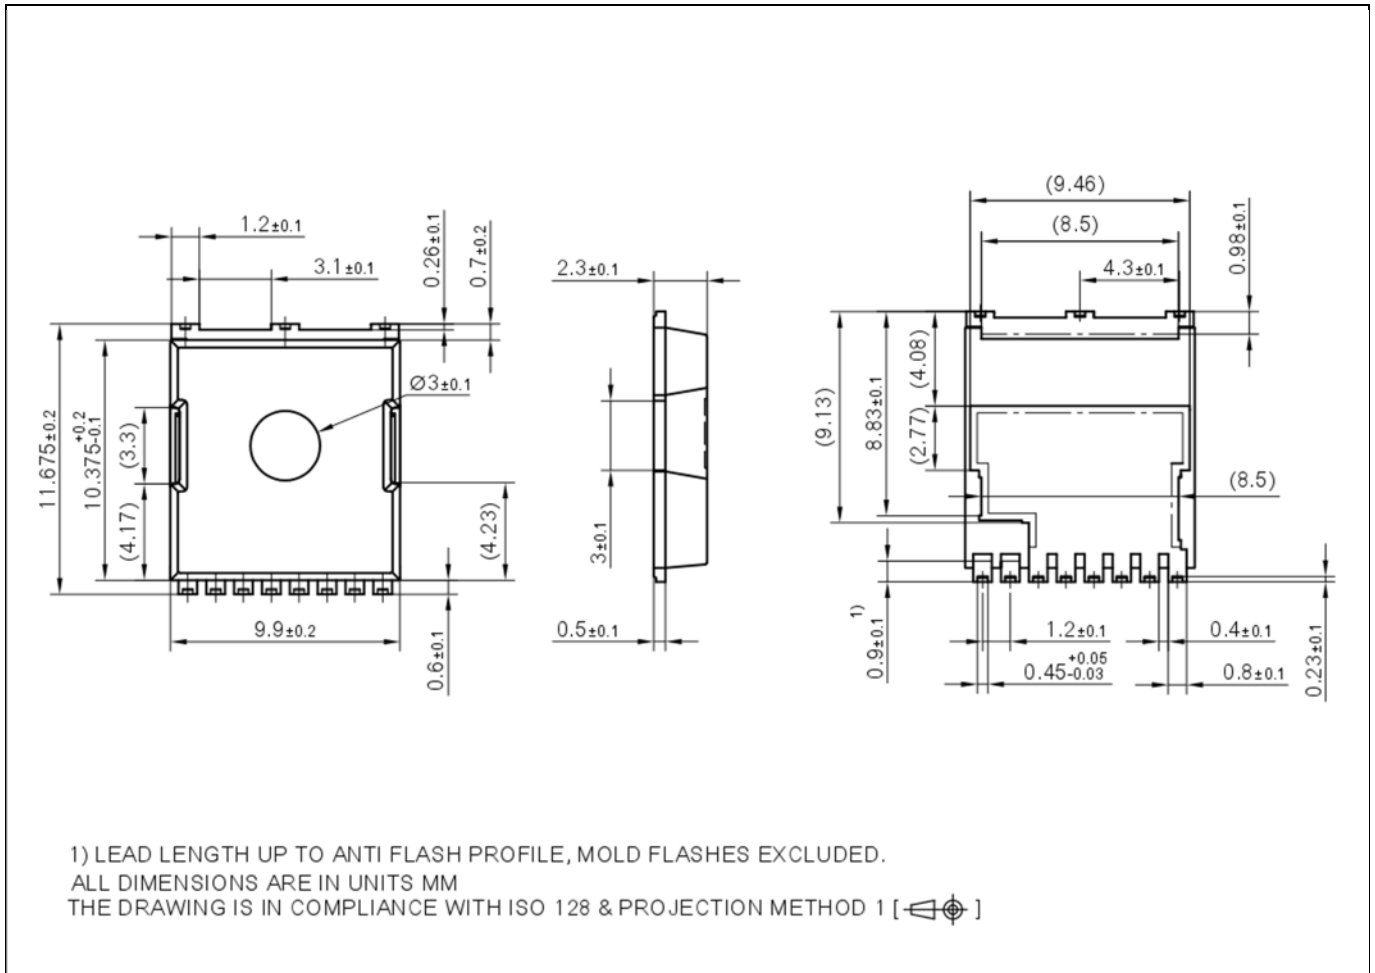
PG-HSOF-8-3 Package Outline, dimensions (mm)
